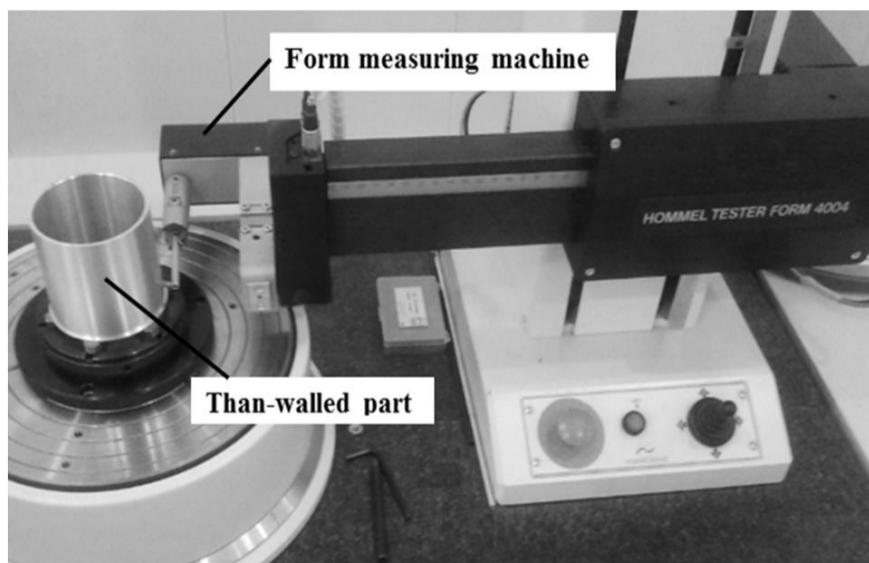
Measurement of distortion in the work piece by the form measurement machine
